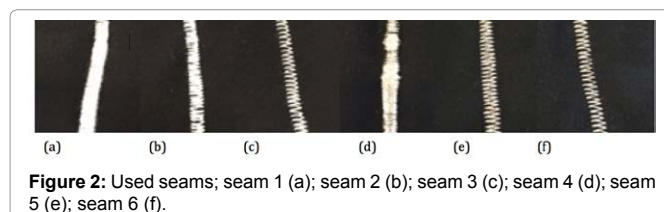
Used seams; seam 1 (a); seam 2 (b); seam 3 (c); seam 4 (d); seam 5 (e); seam 6 (f).
